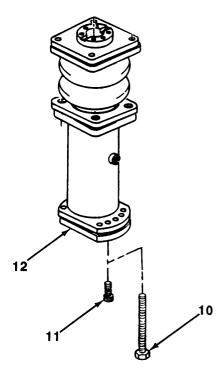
Lower Unit Disassembly Bolts Installation and Removal (VR11).
